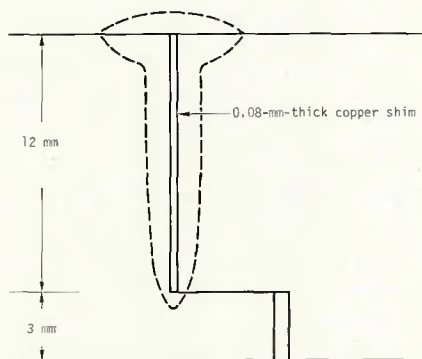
Geometry of weld joint in U-0.75 wt% Ti plate welded with a copper shim
